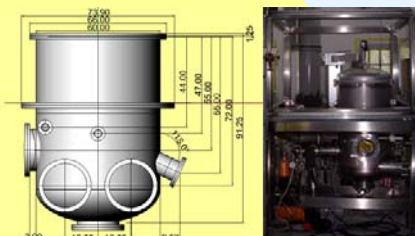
The Evaporator chamber as a technical drawing and the operational evaporator.
